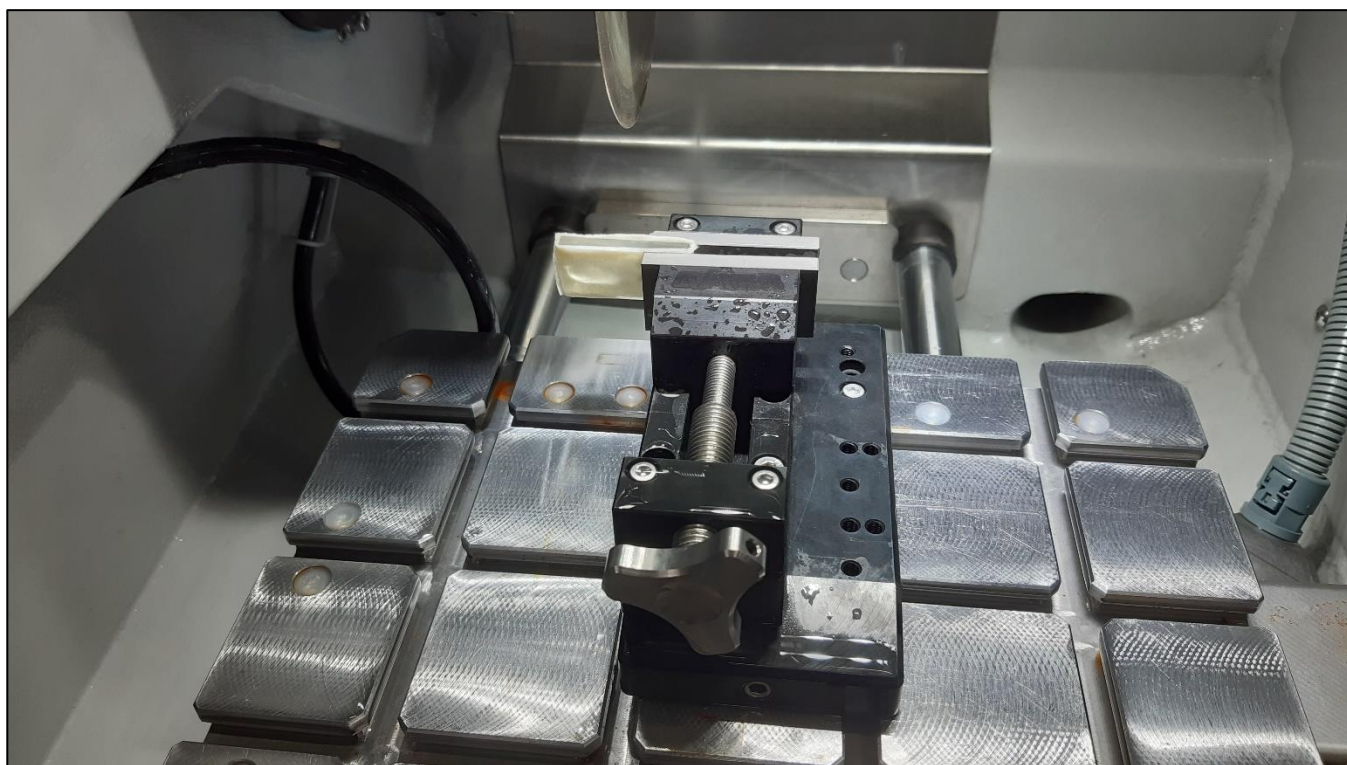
Overview of the clamping tool – glass sample is protected with paper tape.
